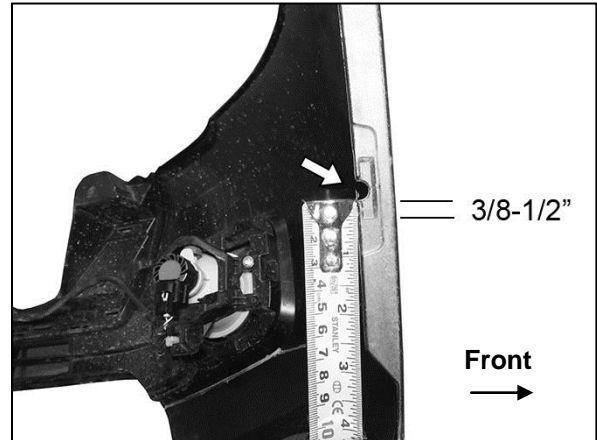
Attach passenger/right Wing assembly to Mounting Bracket
